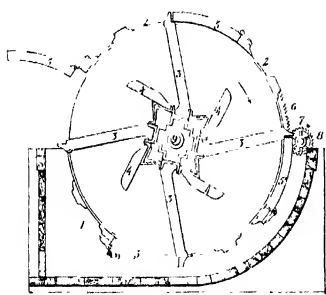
Klauder-Weldon Raw Cotton Dyeing Machine.
